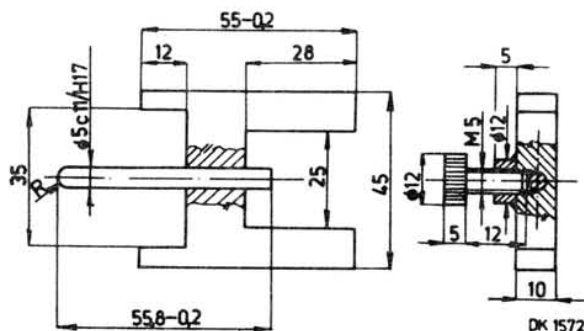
/2 - Brake Booster Press Button Adjusting Fixture
